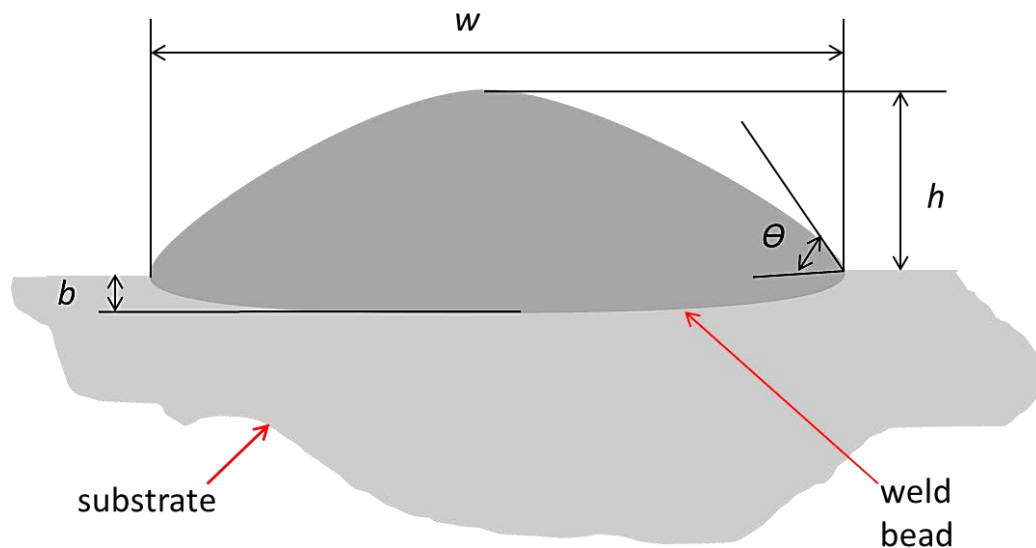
Typical cross section of a laser weld bead [16]
